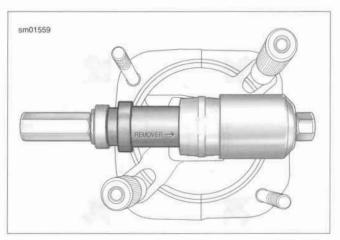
Remover Stackup. Use Remover Side Of Remover/Installer
